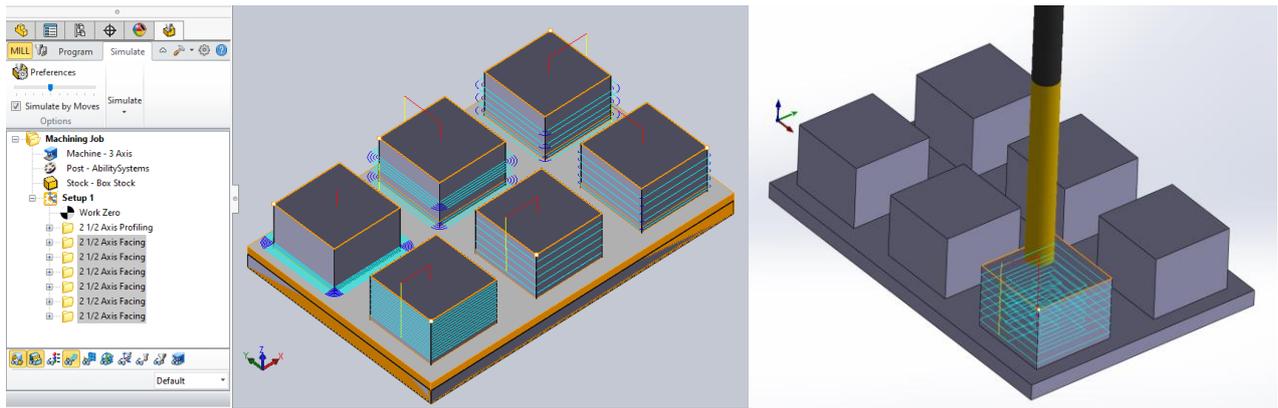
Image of the Solidwork® Software used to generate the machine code.
